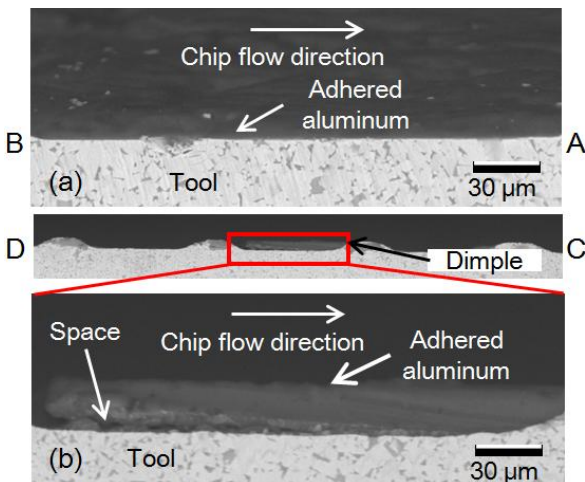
Sectional view (a) non-textured tool (b) DT06
